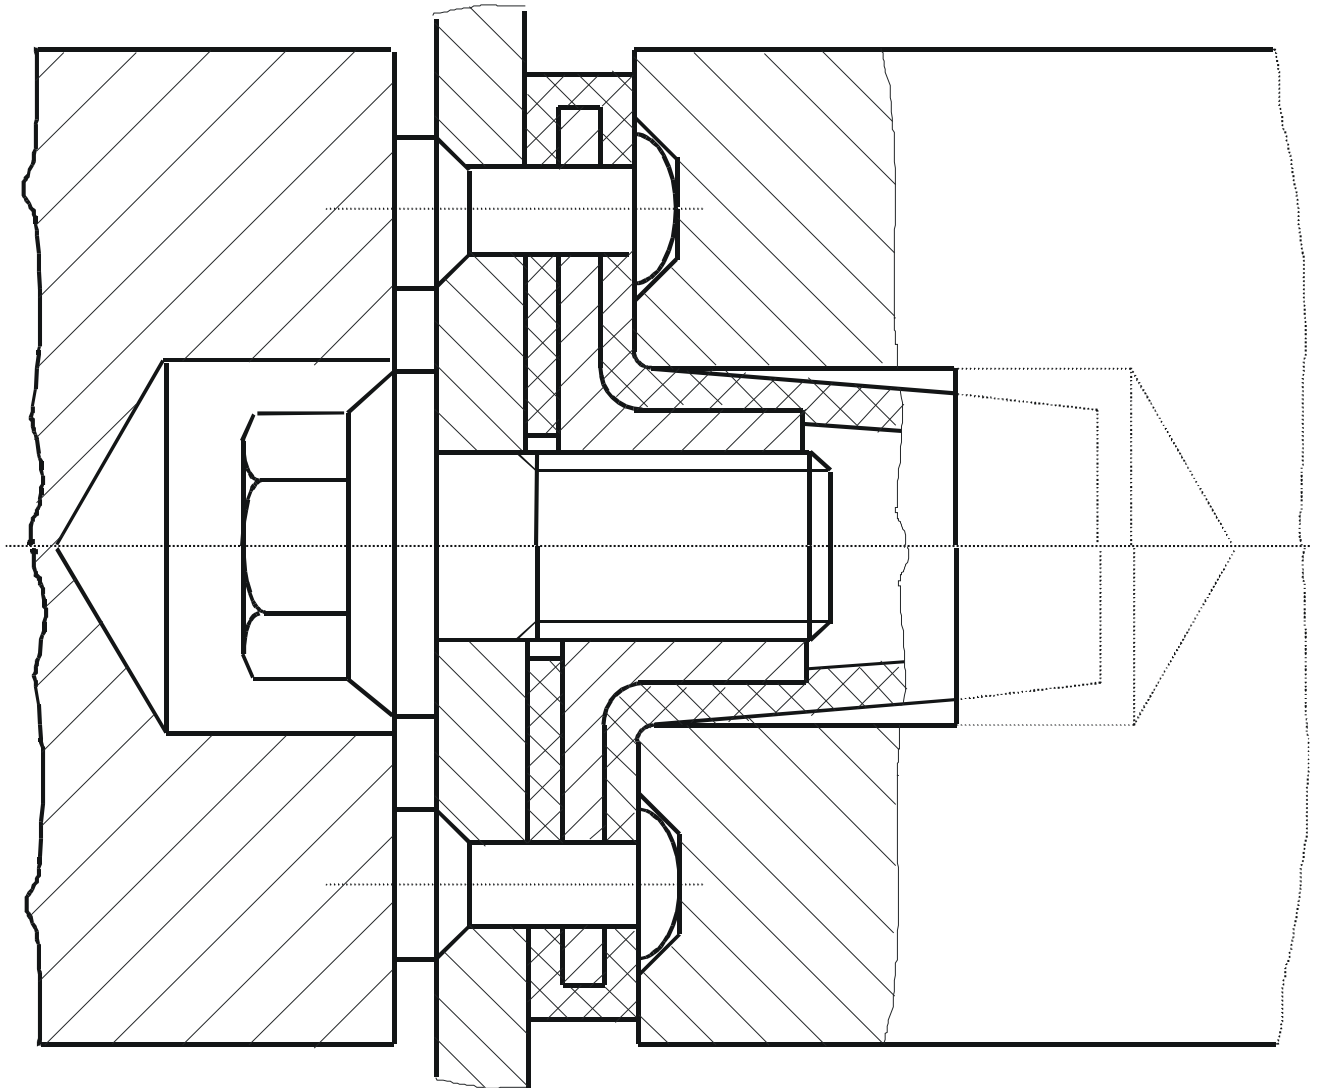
Interaction between Processing Squeezing Fixtures and Bolt under Riveting
